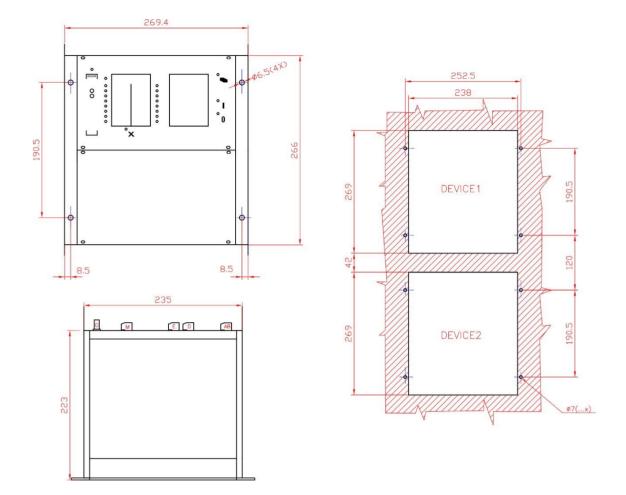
Dimensions for rack mounting of 42 HP double rack
